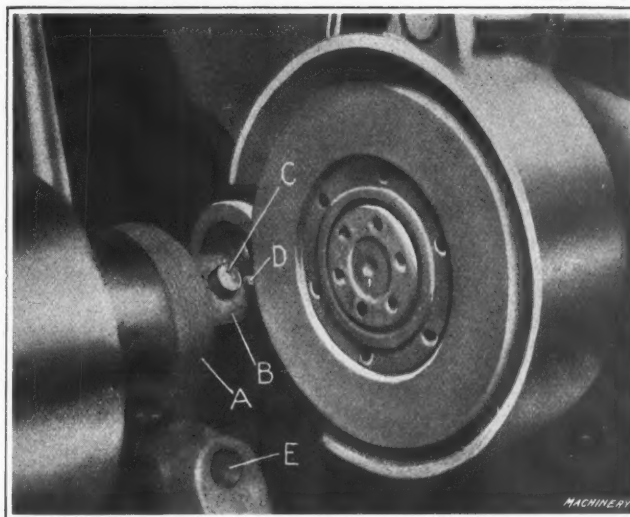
Simple Wheel Truing Device for Use on Bryant Two-spindle Chucking Grinder
